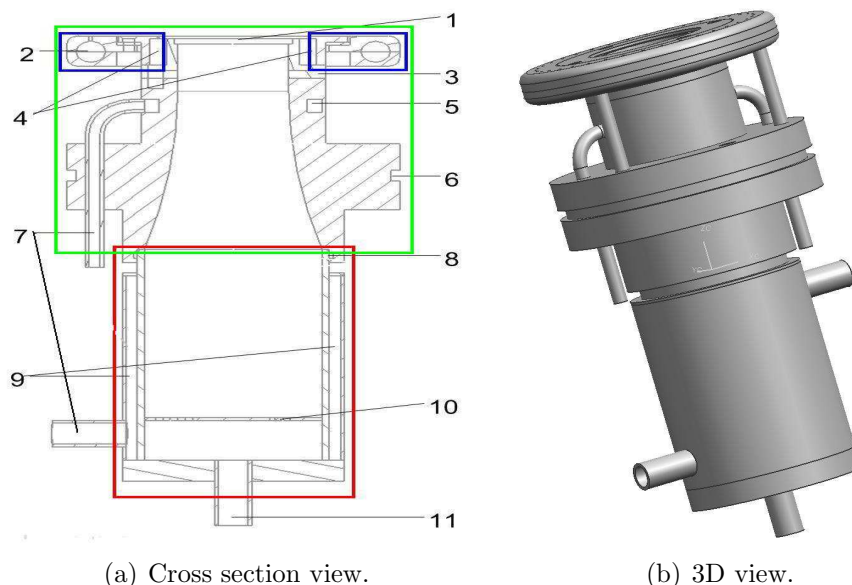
Burner head and plenum chamber, definition of parts. 1. Burner plate area, 2. Diffuser channel, 3. Insulating PEEK ring, 4. Chamber for electric heating element, 5. Cold water jacket, 6. O-ring, 7. Inlet cold water jacket 1, 8. O-ring, 9. Cold water jacket 2, 10. Perforated plate (flow straightener), 11. Inlet fuel/air mixture.
